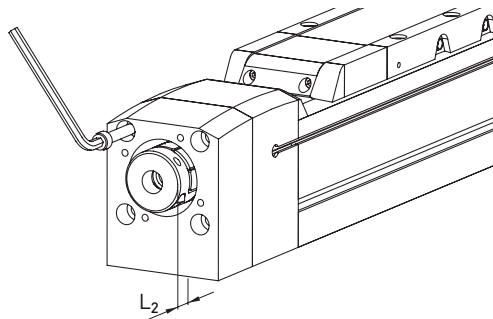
Mounting the clamping hub and the coupling housing KB on the linear axis HM-S
